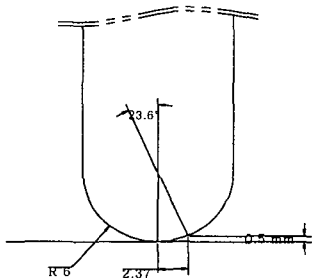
Schematic view of the contact degree of workpieces and ball end mill according to the cutting depth
